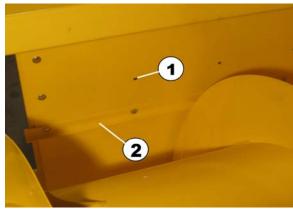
Auger Stripper Placement Key 1 - Secondary Auger Stripper Holes Key 2 - Auger Stripper (single)
